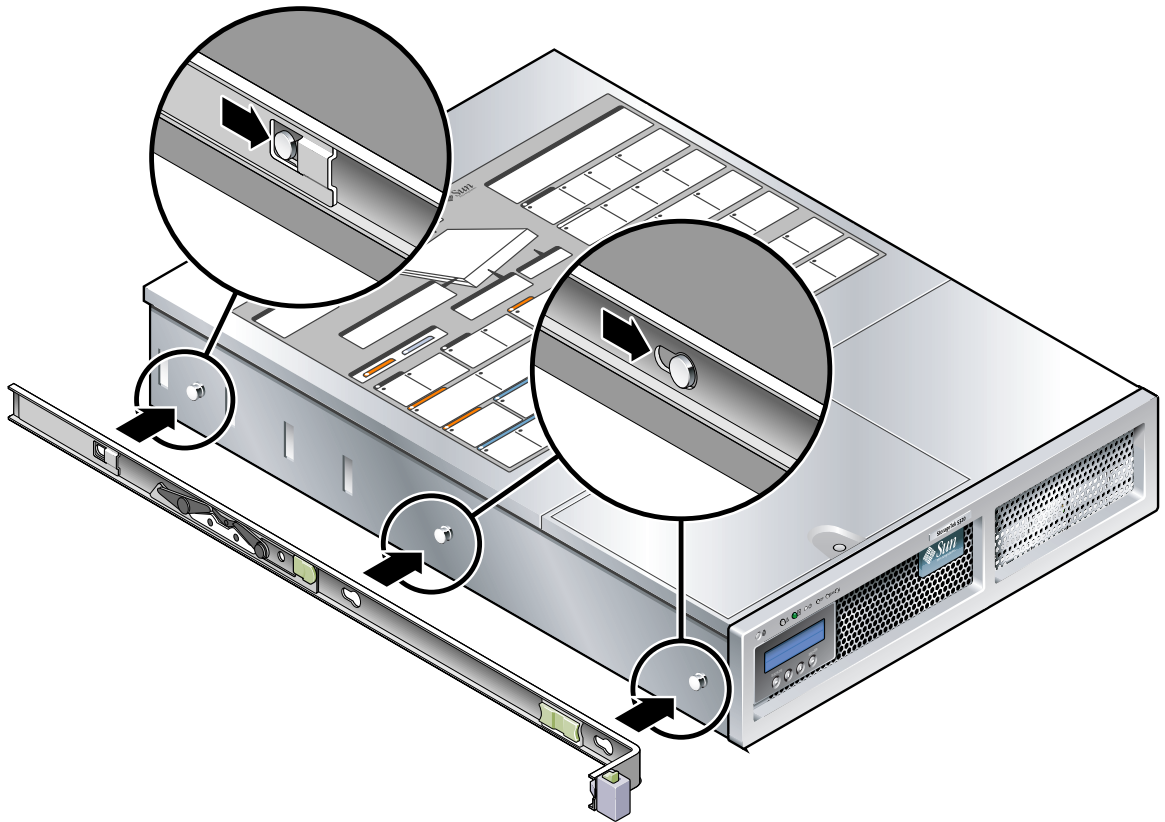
Attaching a Mounting Bracket to the Chassis
